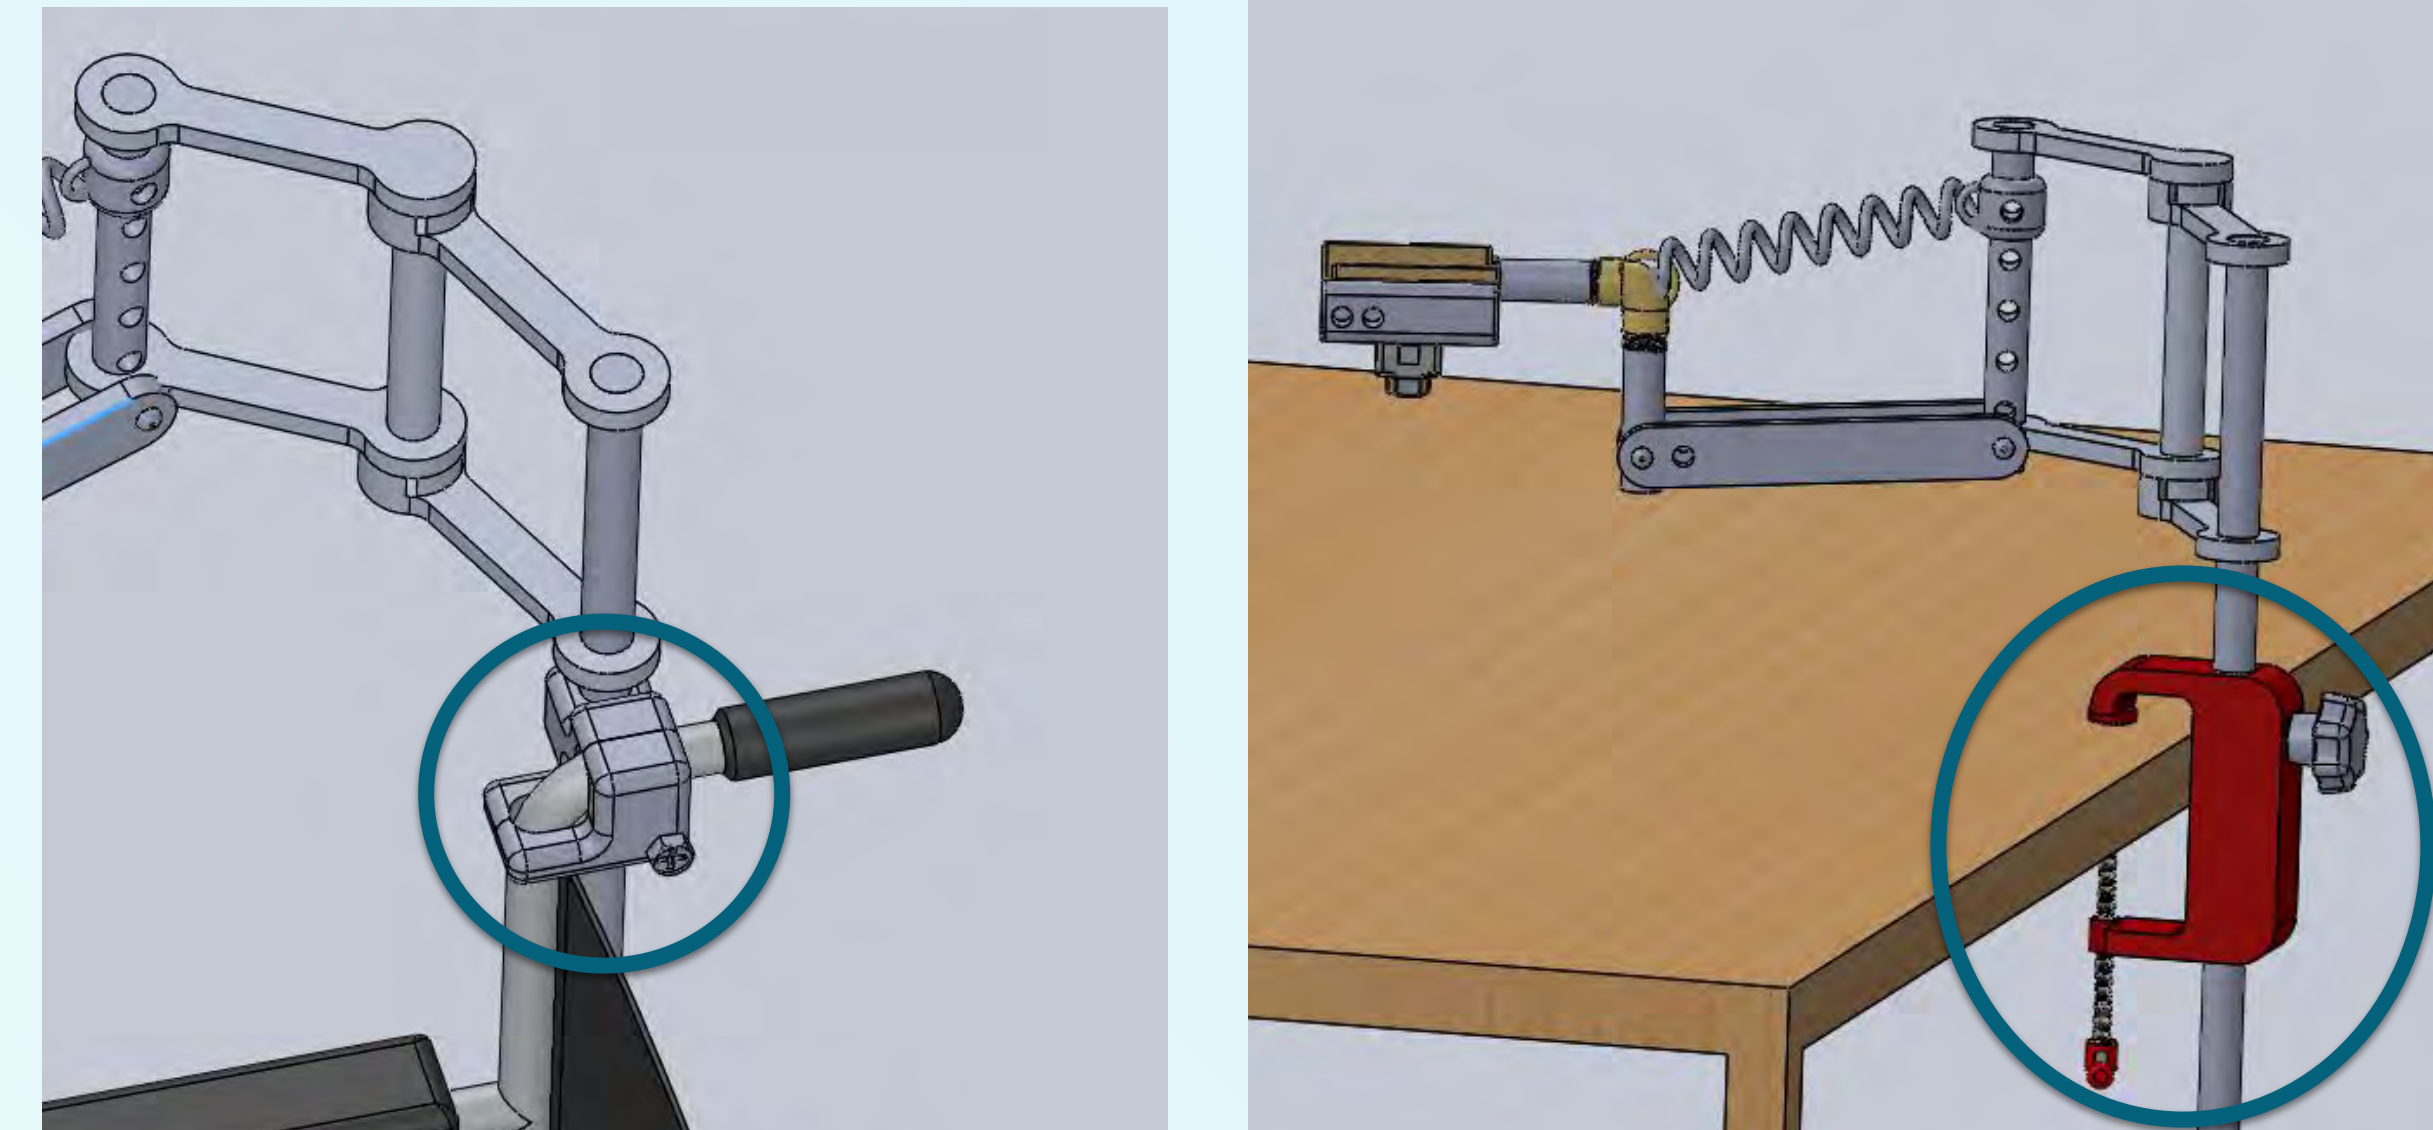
Figure E. Computer Aided Design (CAD) Assemblies of the wheelchair mount (left) and table clamp (right)
